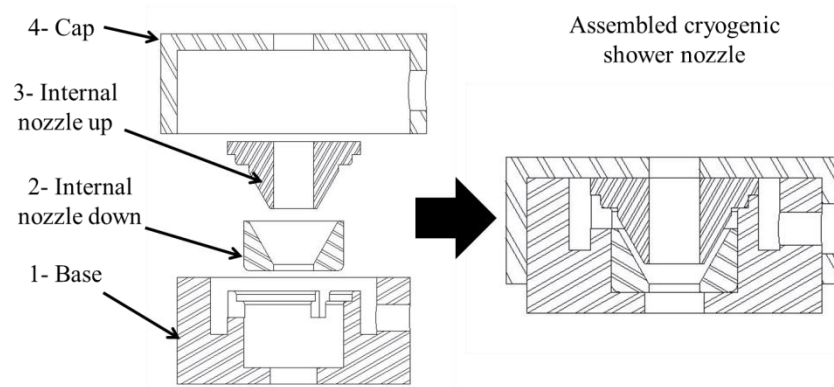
Presentation of different parts of cryogenic shower nozzle
